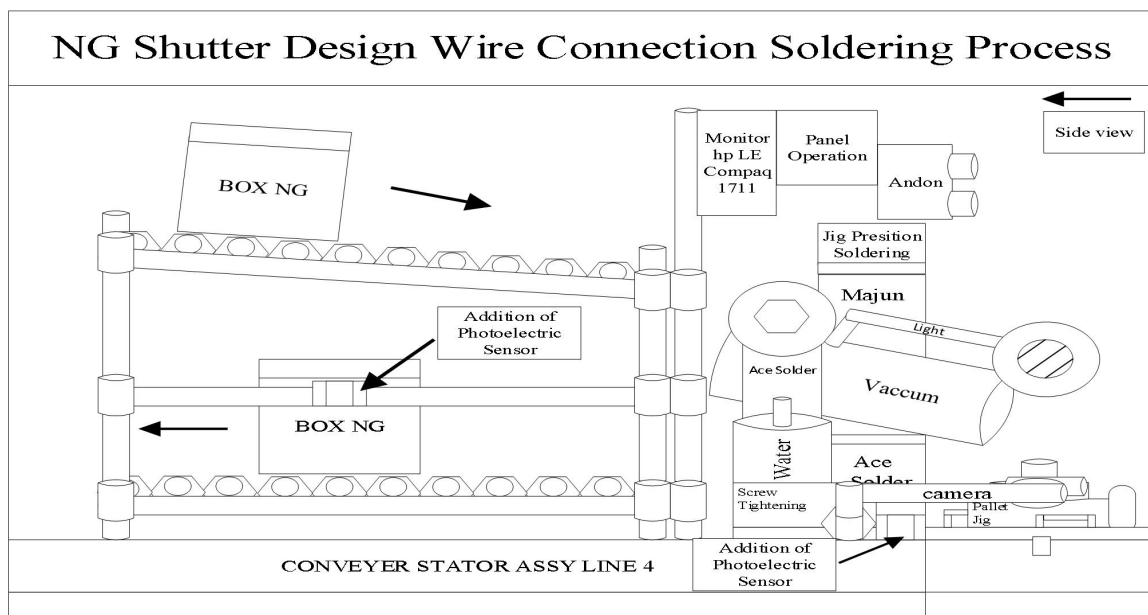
Shutter NG Design in Wire Connection Soldering Process
